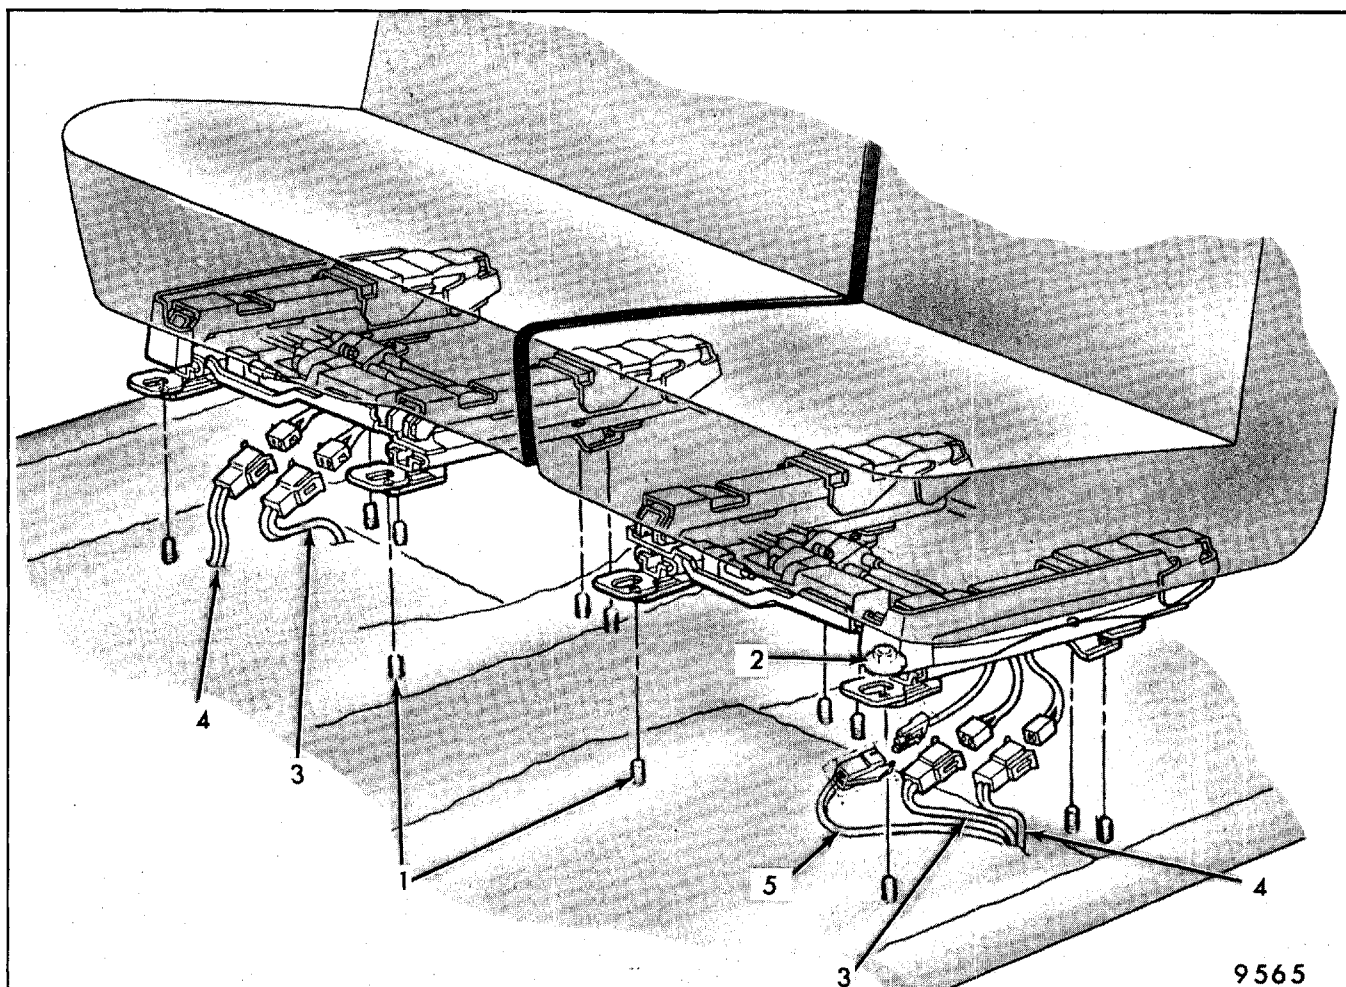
"B and C" Body Power Operated Seats - 45-55 Seat Shown
